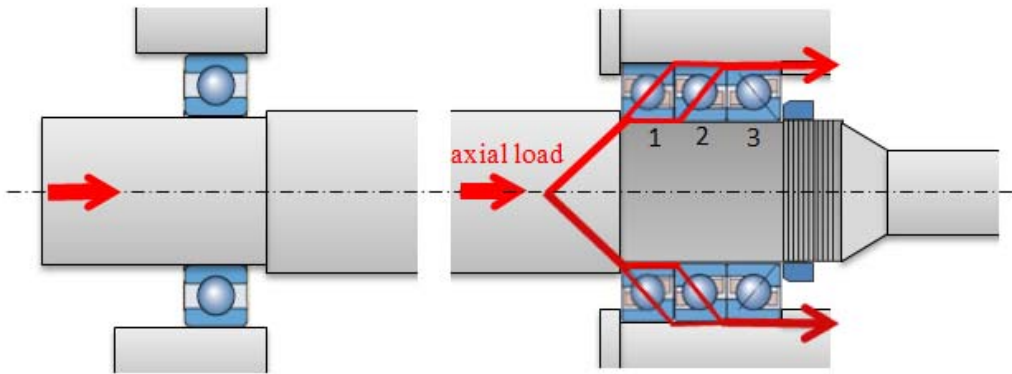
New bearing system, with a double bearing and three angular bearings.
